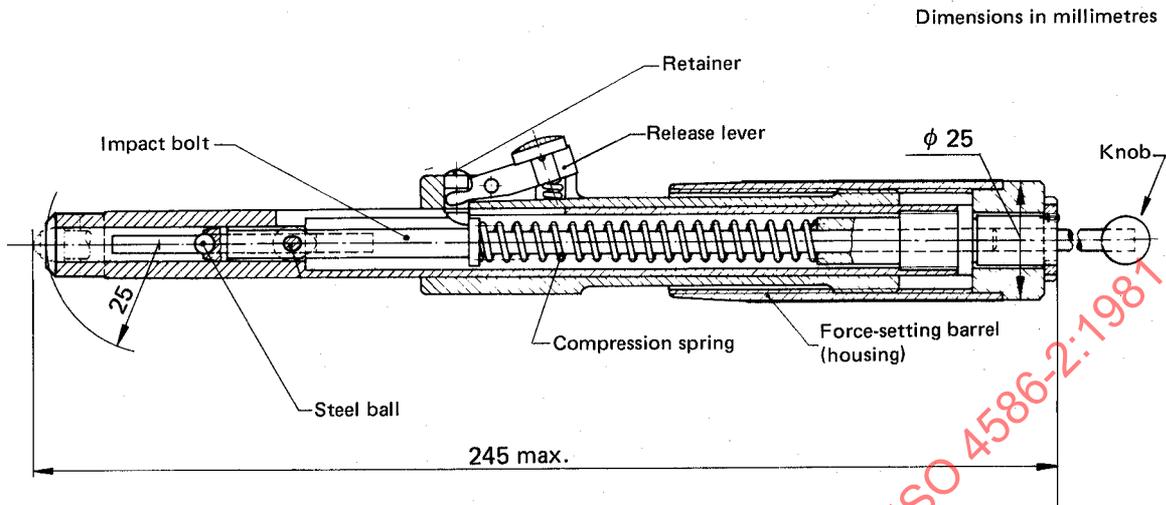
Impact tester (shown with spring compressed) (see 11.3.1)
